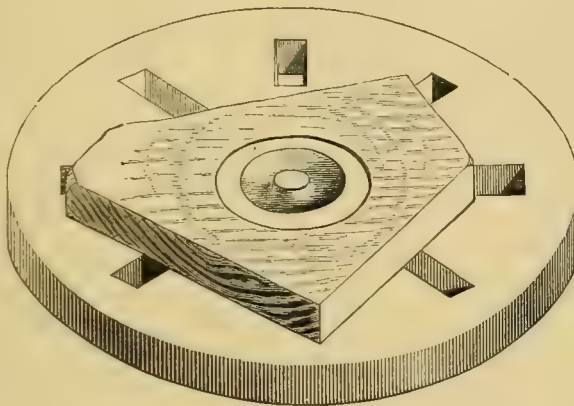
CYLINDER COVER IN WOOD CHUCK.
